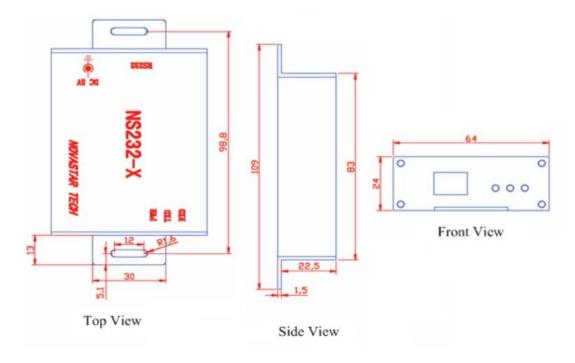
detail geometric structures of NS232-R and NS232-T (unit mm)
